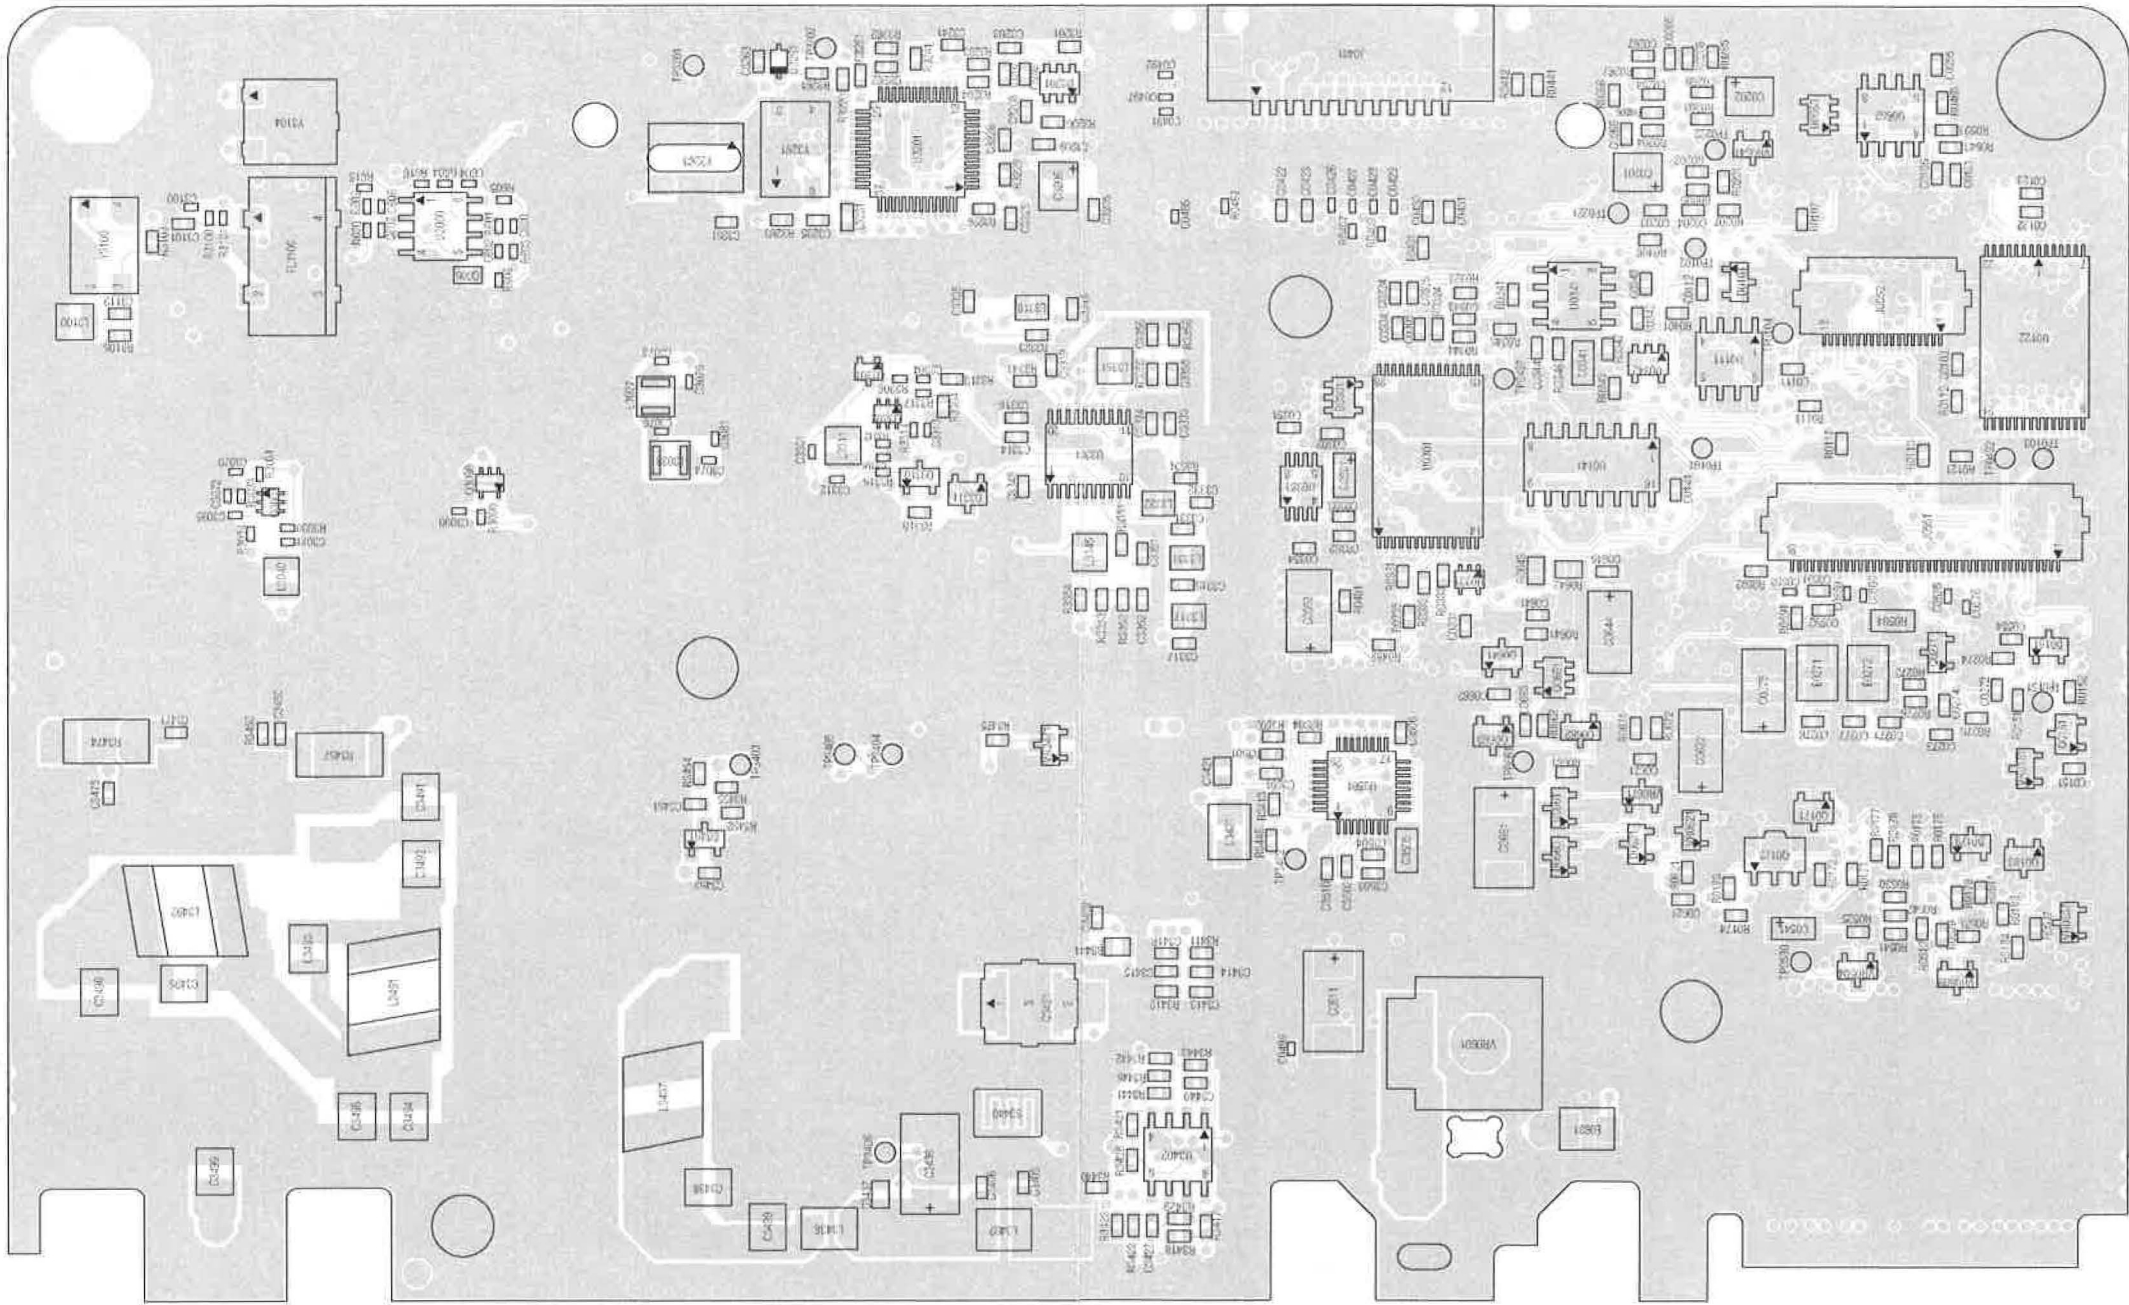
200 MHz Main Board Bottom Side PCB
